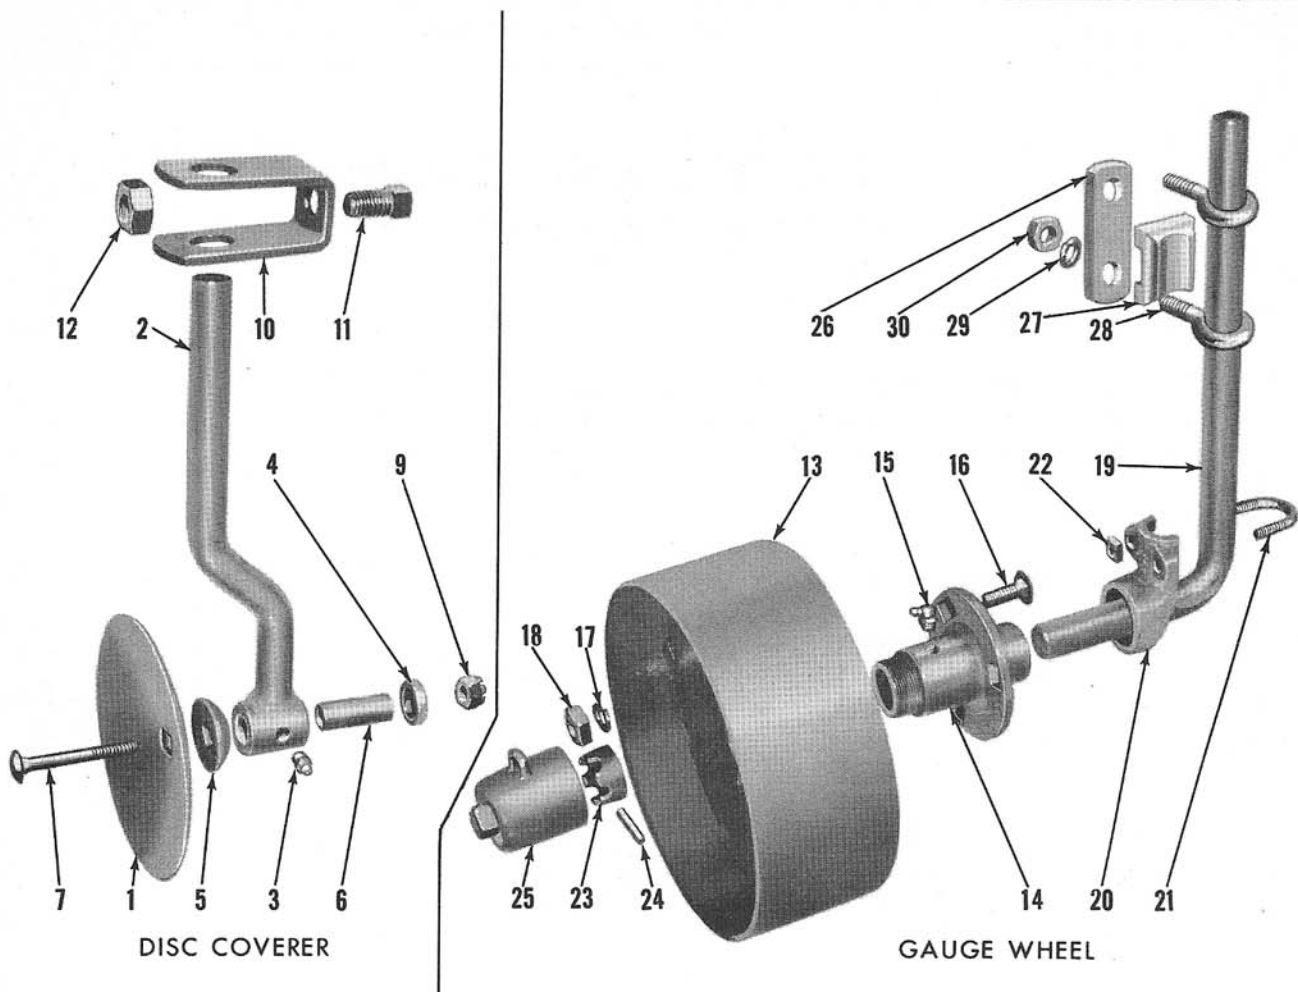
Disk Coverer and Gauge Wheel Assemblies
